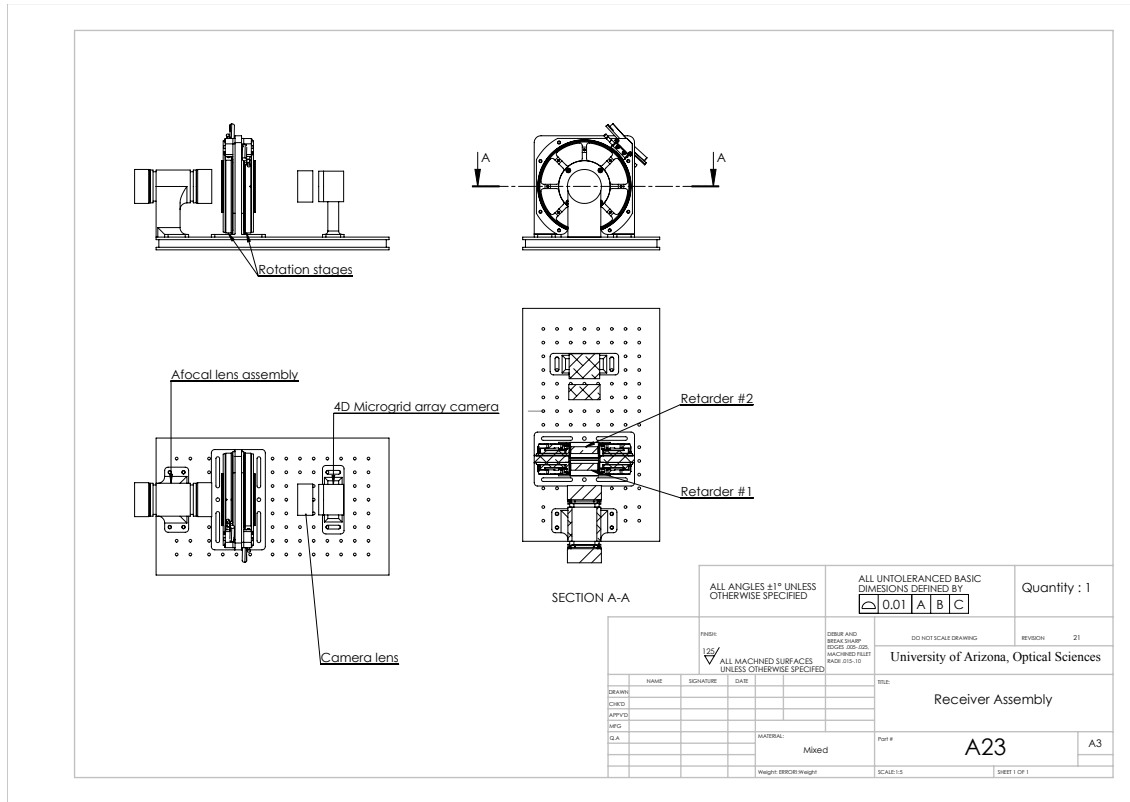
Receiver (PSA) assembly, zoom in for detail.
